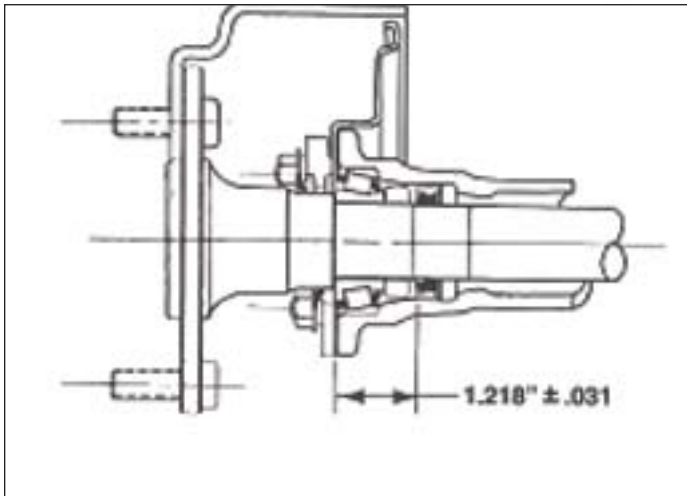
Rear Axle Tolerance - Dana Heavy Duty
